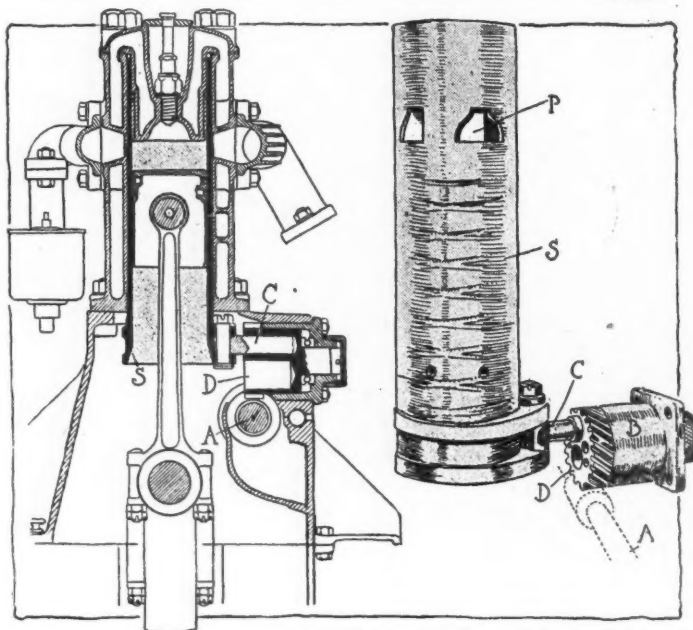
TWO VIEWS OF ARGYLL SLEEVE MOTOR
